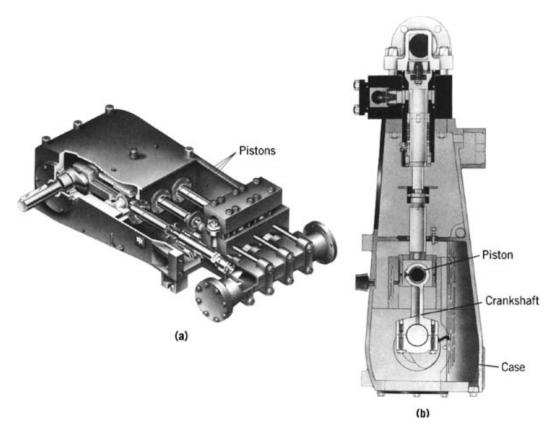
(a) Reciprocating pump and (b) cross-sectional view.(Courtesy of Ingersoll-Dresser Pumps.)
